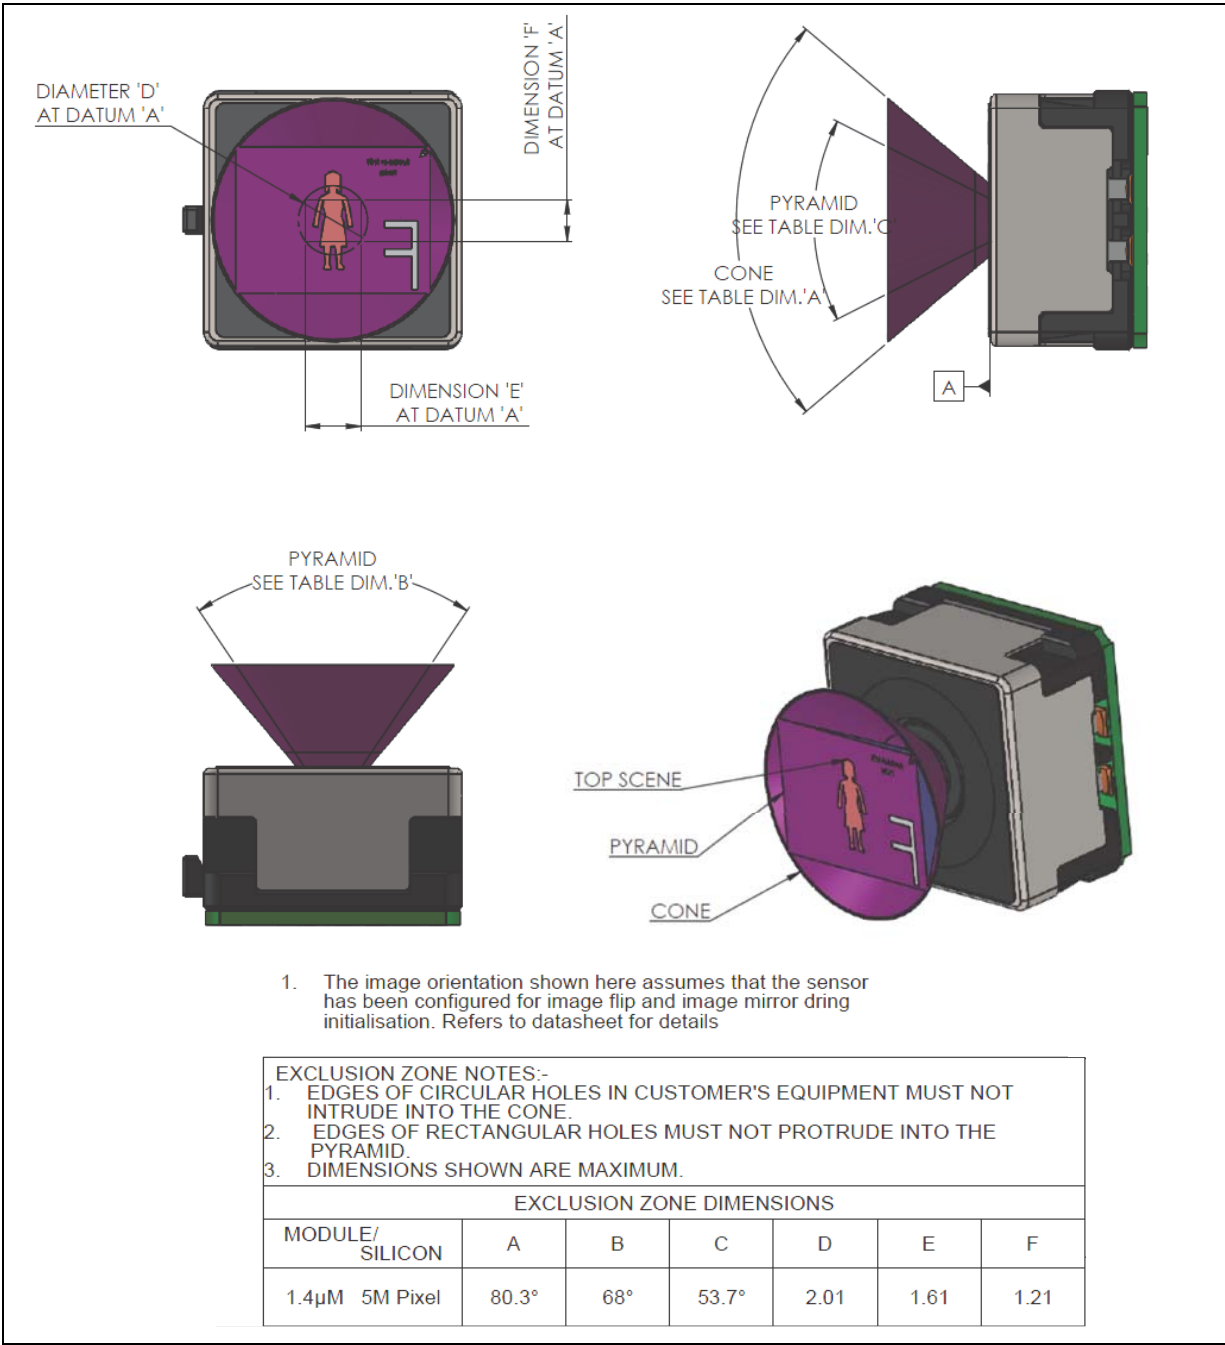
VB6955CM outline drawing in mm - sheet 3 of 6
